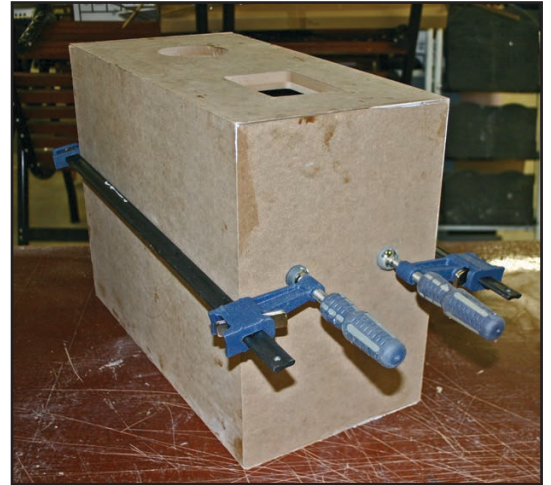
Clamps are used to hold the panels as the glue dries. An optional step is to use a nail gun to hold the panels, which reduces the need for multiple clamps.
